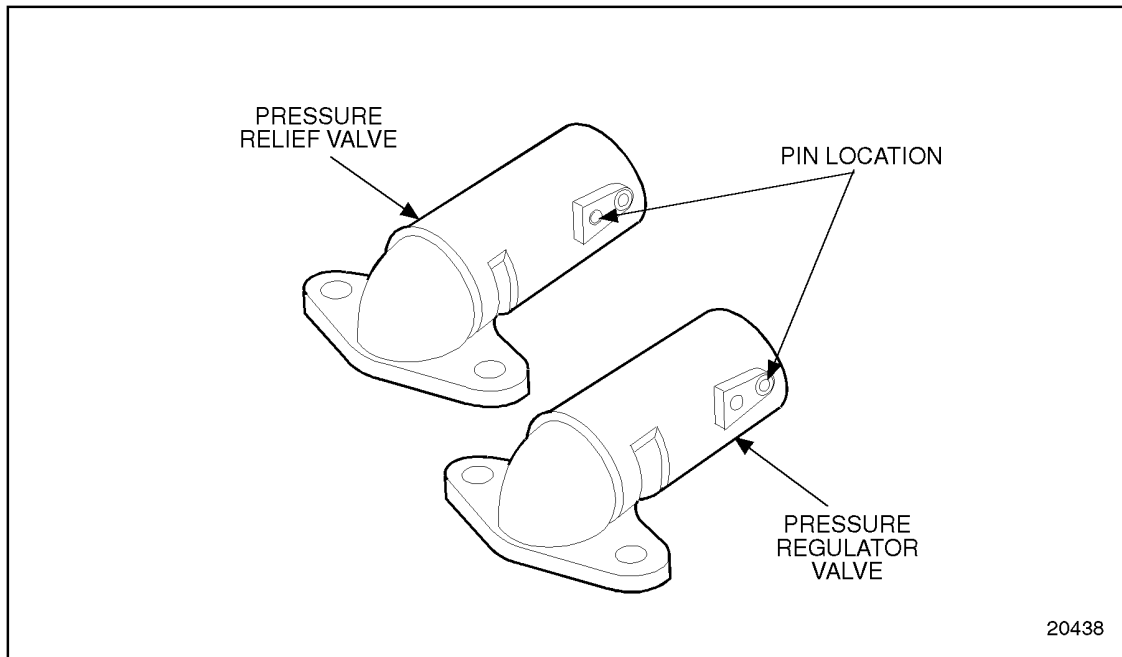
Comparison of Pressure Regulator and Relief Valve Assemblies
